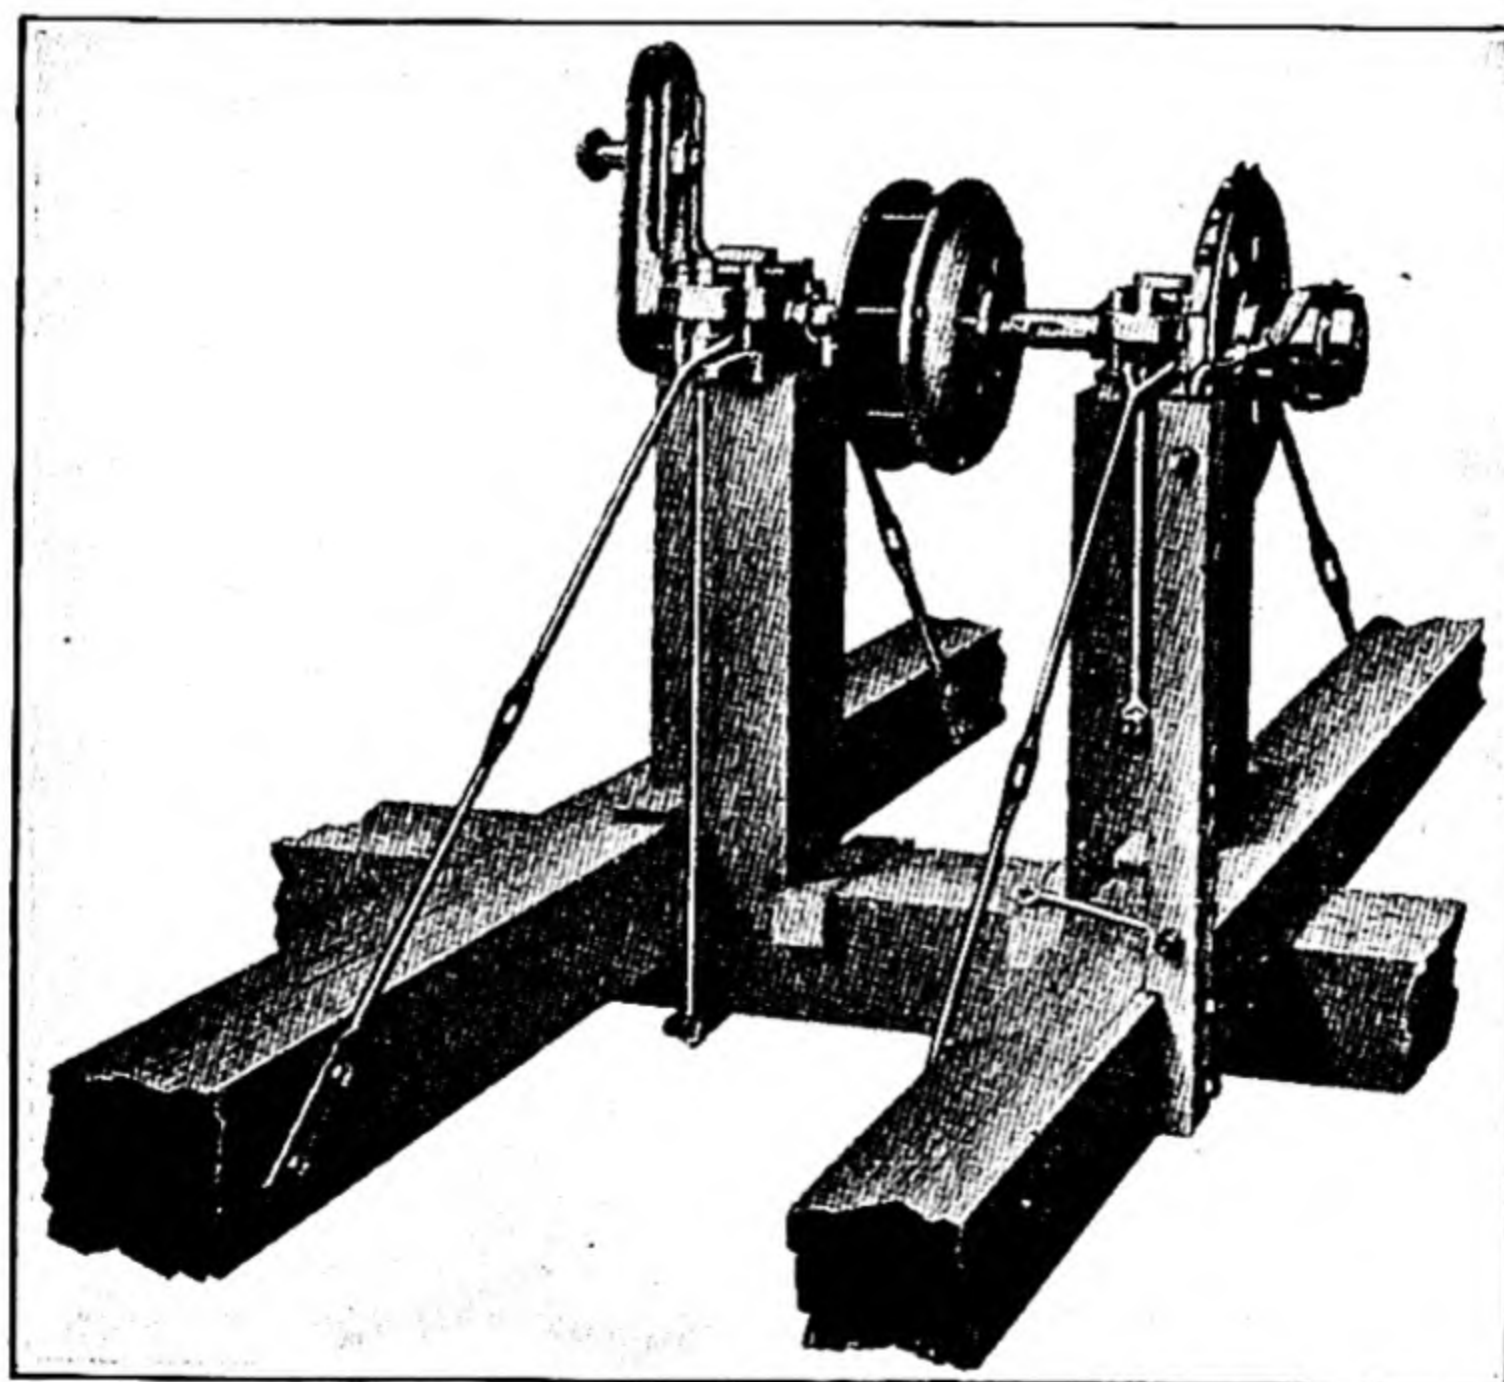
Showing assembly of crank, wrist pin, crankshaft, band-wheel gudgeons, sprocket, clutch, braces and supporting posts and sills.
